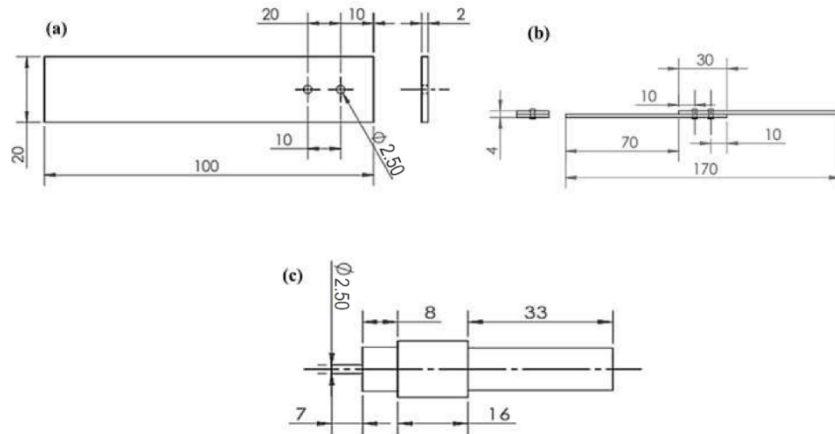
(a) Plate dimensions and FSSW distance, (b) Rivet installation scheme, (c) FSSW tool.
